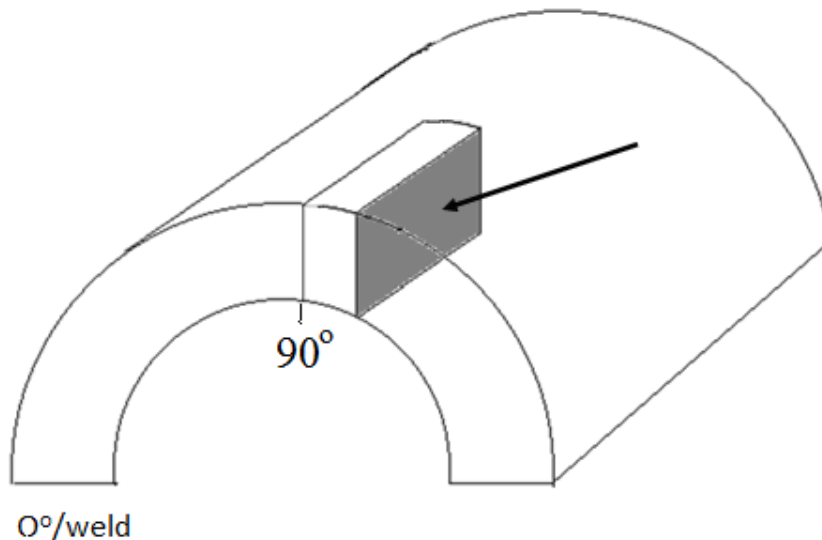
The cutting location of specimens for cleanliness examination. The specimen was cut through thickness of the pipe at a location of 90 degree from the weld seam (or 0 degree for seamless pipe).
